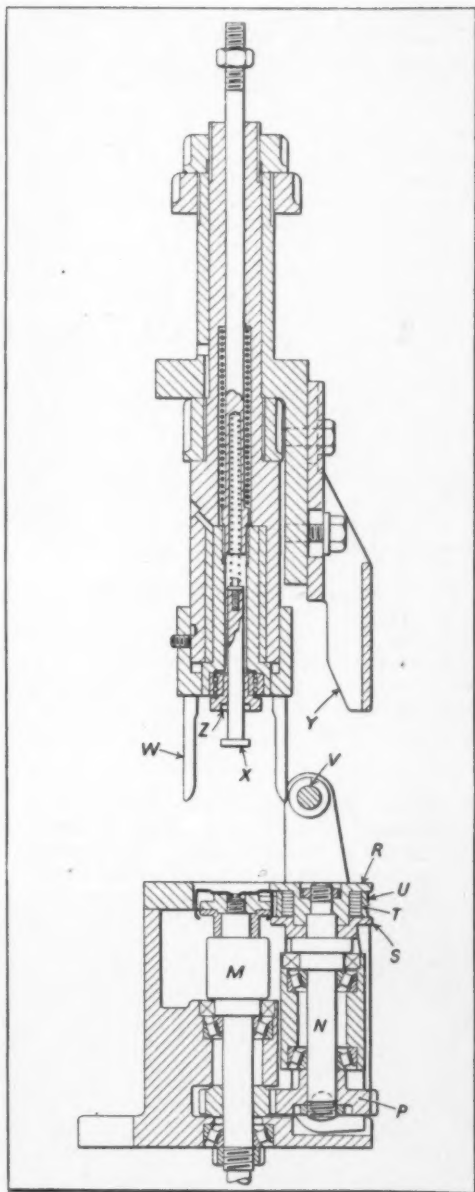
The Rotary Forming Unit for Curling Inwards the Open End of the Pressing B, Fig. 8. The Curling Spindle is Fed Inwards Towards the Driven Work-support Mandrel by a Cam-plate on the Upper Tool Assembly
